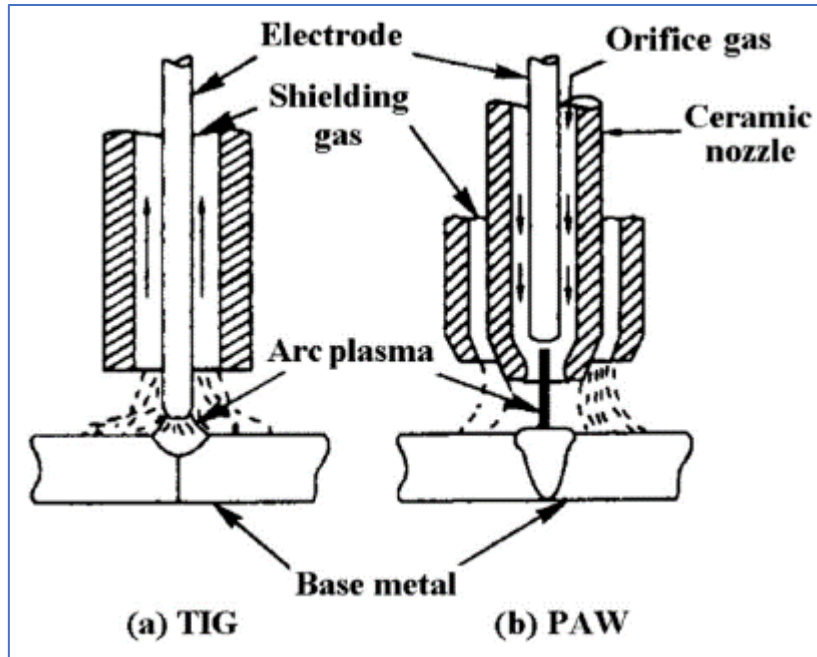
Arc plasma difference between Tungsten Inert Gas (TIG) Welding (i.e., GTAW) and PAW [14]
